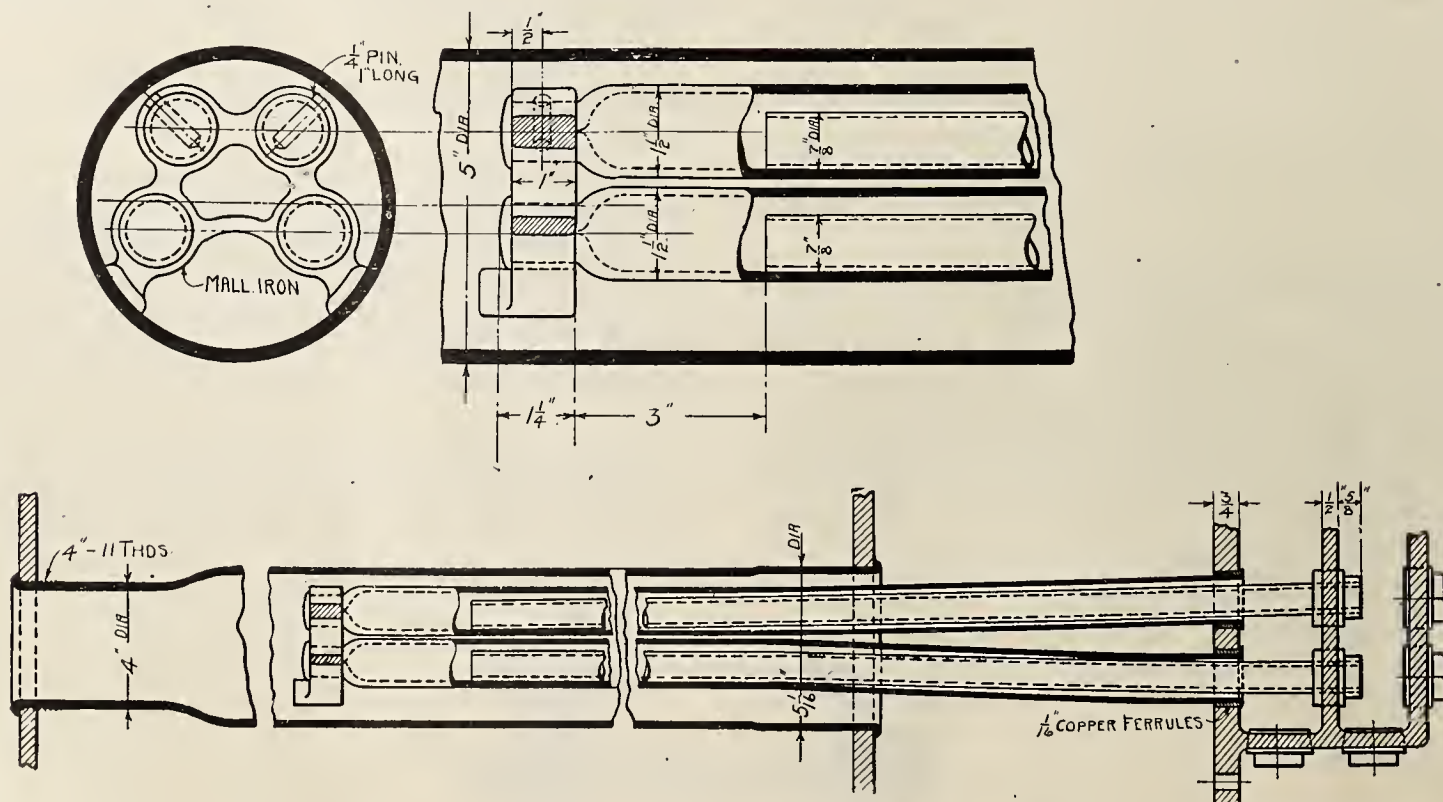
DETAILS OF SUPERHEATER, ERIE ENGINE.
